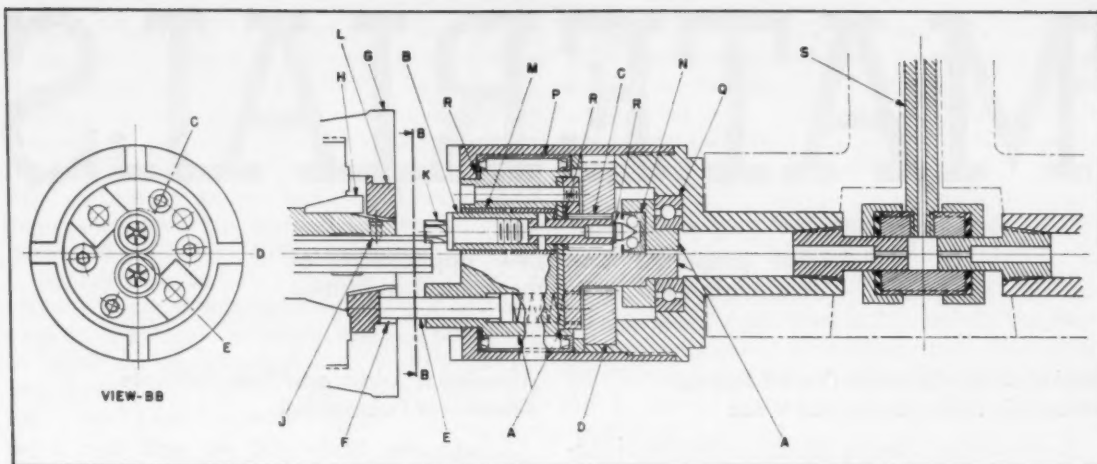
While carrier-spindle (A) revolves in unison with the machine spindle, end-mills (K) revolve on their own centers.
